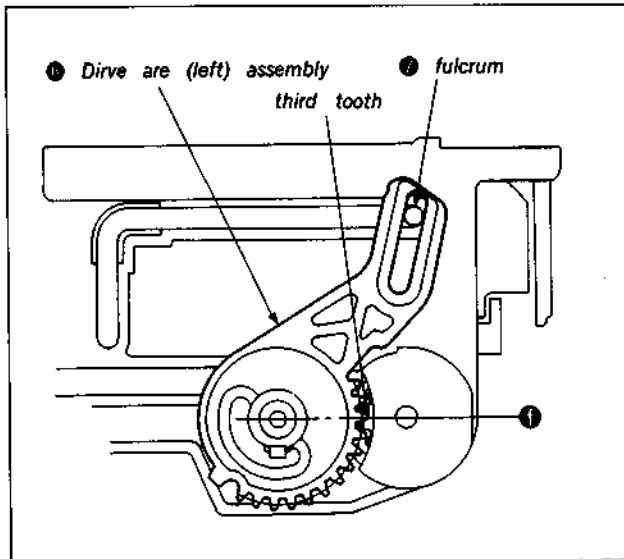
B. Adjustment method of position (phase) matching of left gear wheel
